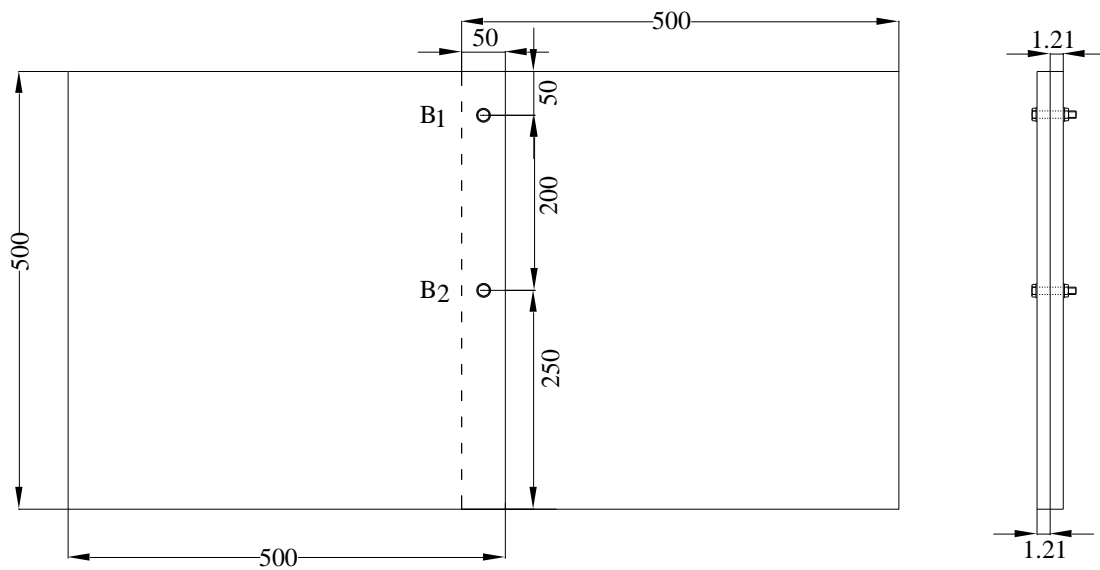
Geometric dimensions of plates with bolted lap joint (Case-3)
